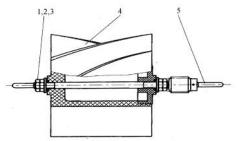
Spiral wing structure diagram 1-Nut; 2-Washer; 3-O-seal; 4-Wing wheel; 5-Other components
